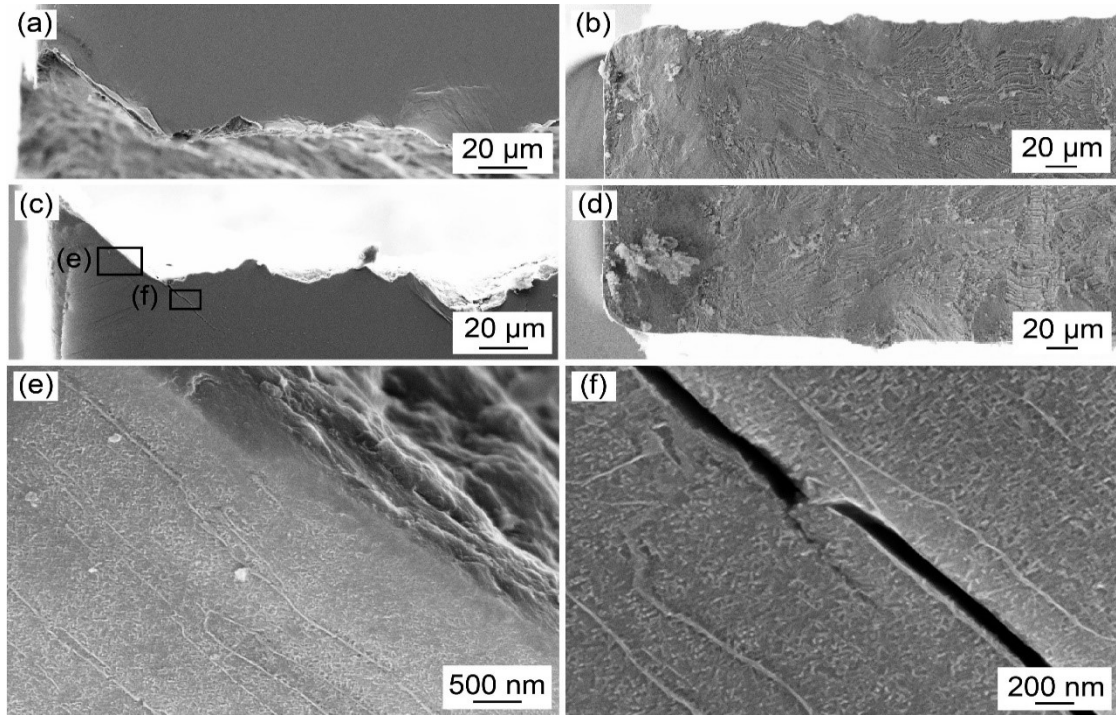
The crack initiation location of specimen aged at 500 °C for 5 h. The side views (a) and (c) and the fractographies (b) and (d) of the crack initiation location. (e) and (f) The high magnification images of the places marked in (c).
